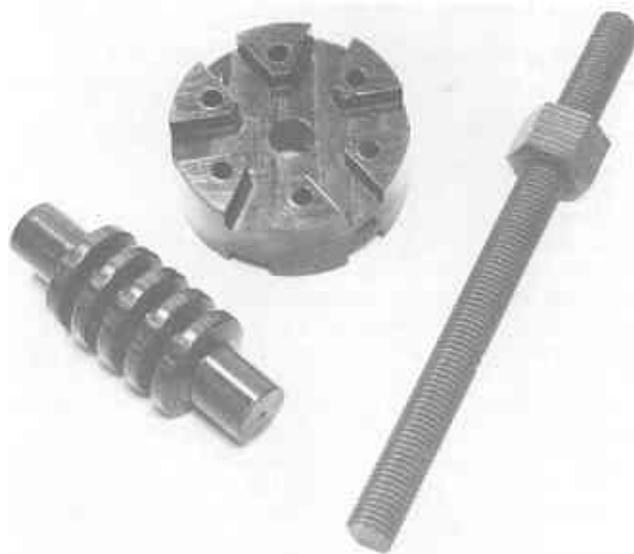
Compreg gears. Compreg is tough, hard, and machinable. (M 87 0064)
